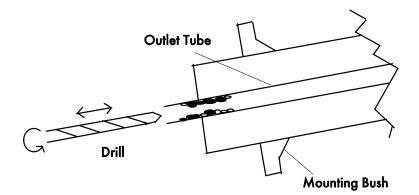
i Diagram to Show Method of Cleaning a Blocked Outlet Tube
